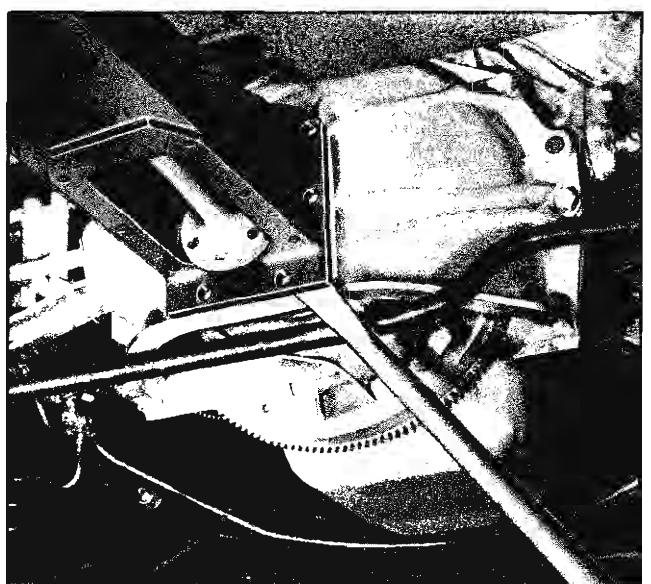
Removing Torque Tube and Propeller Shaft from Flywheel Housing
